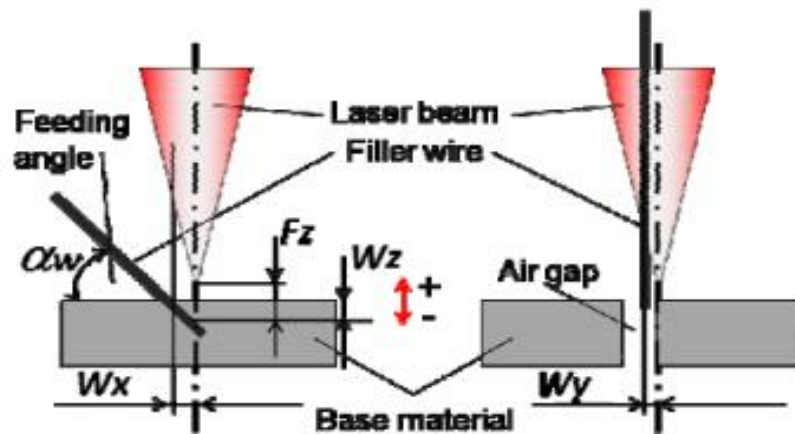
Relative position between filler wire, laser beam, workpiece [153]
